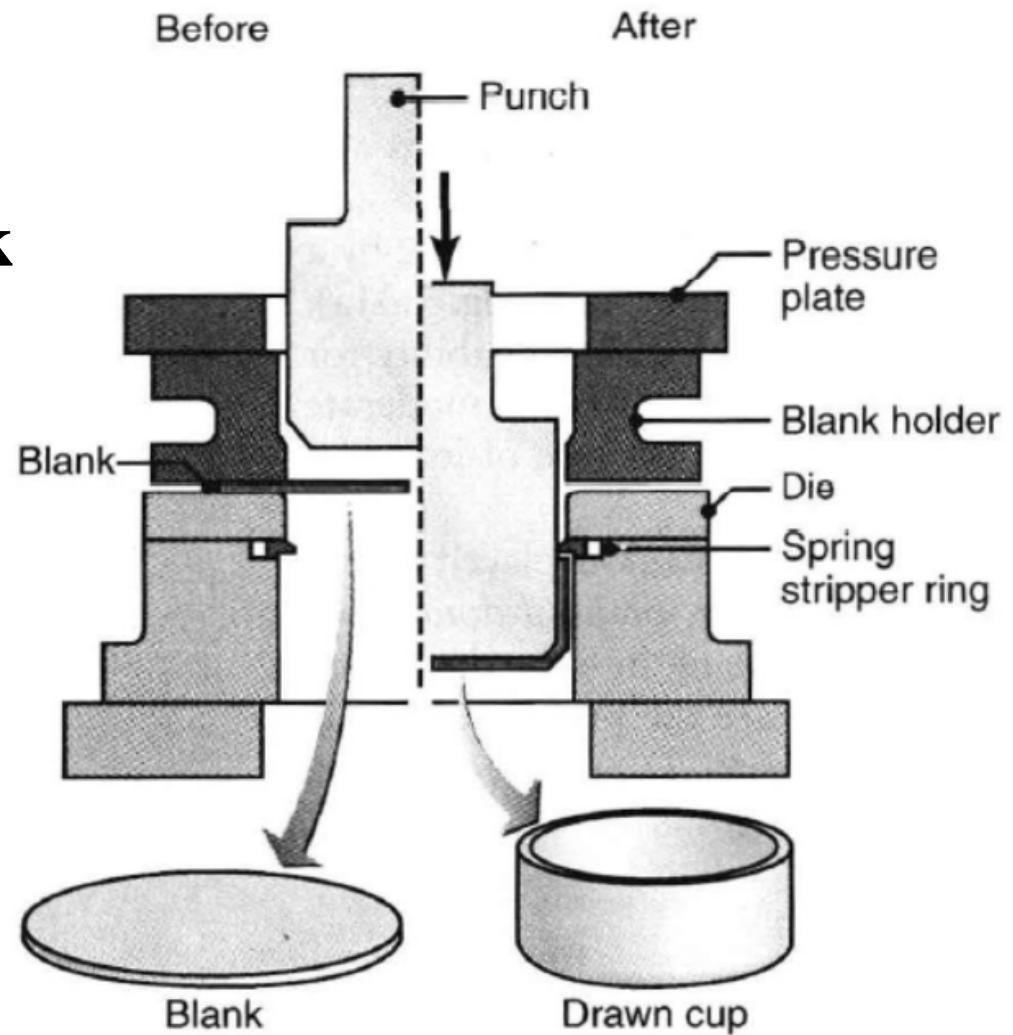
(a) schematic illustration of the deep-drawing process on a circular sheet-metal blank.
